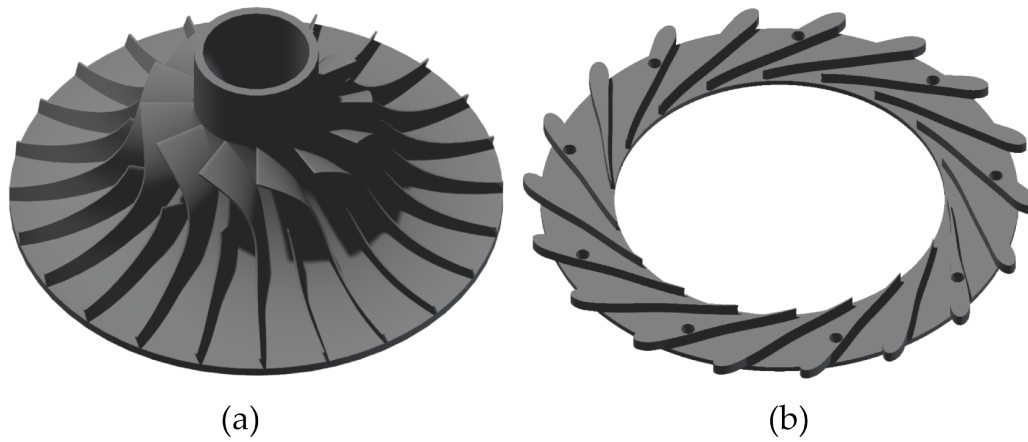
CAD model of the impeller (a) and diffuser (b)
